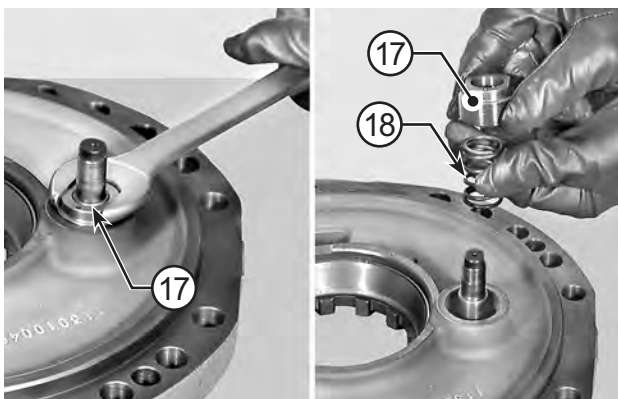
Loosen piston stop ring nut (17); remove ring nut and spring (18).
